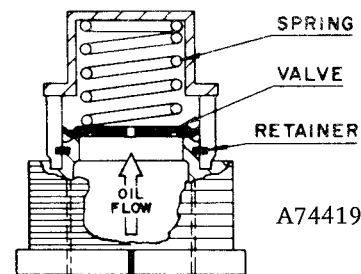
OIL FLOW CONTROL VALVE
